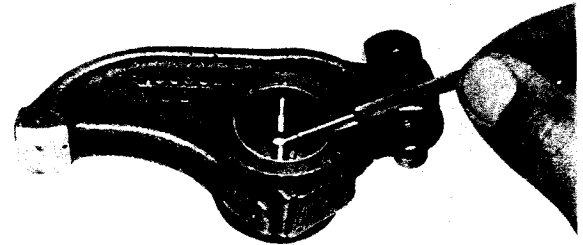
, (V40306). Checking rocker lever bushing inside diameter
